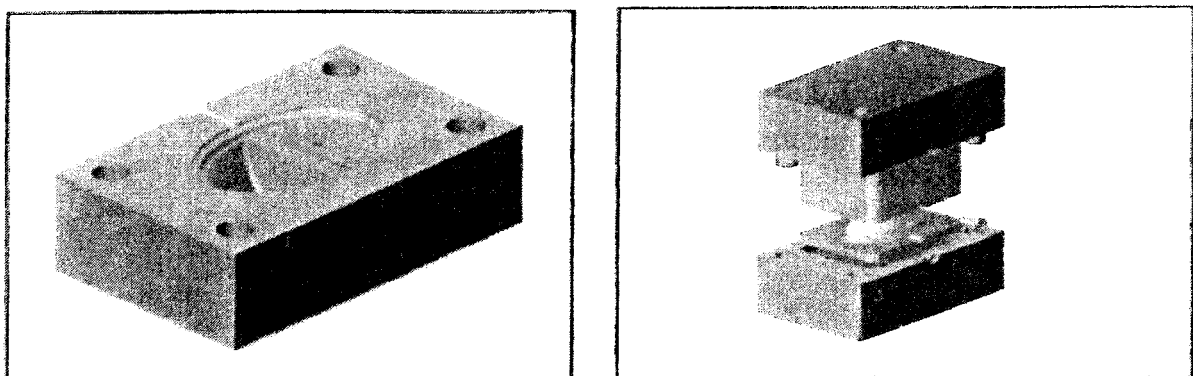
Mould tool design of mould (female) and total tooling for Millennium Bridge
